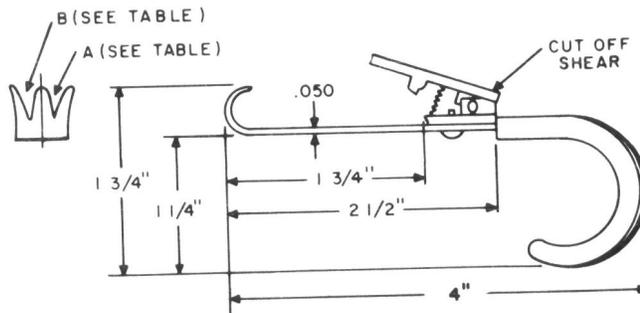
KS-20620, L5 or L6, Wire Stripper Tool
